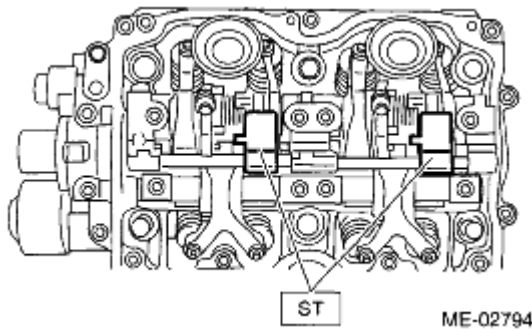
Setting ST (18354AA000 Valve Rocker Holder)
